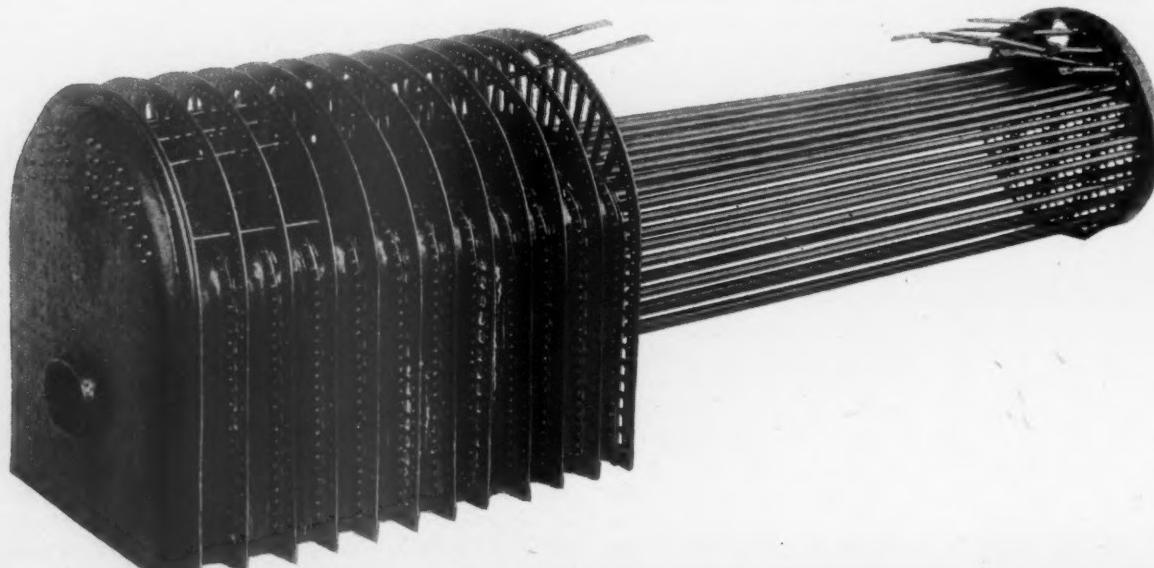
VIEW OF FIREBOX WITH BOILER SHEEL AND OUTSIDE SECTIONS REMOVED.
